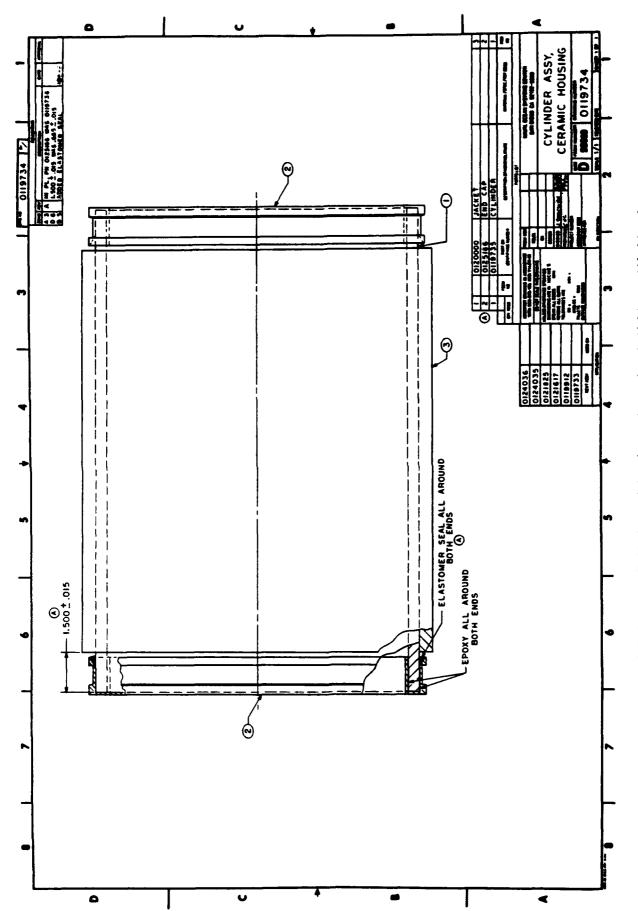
12-inch-diameter cylindrical ceramic housing section equipped with improved Mod 1 end cape.
